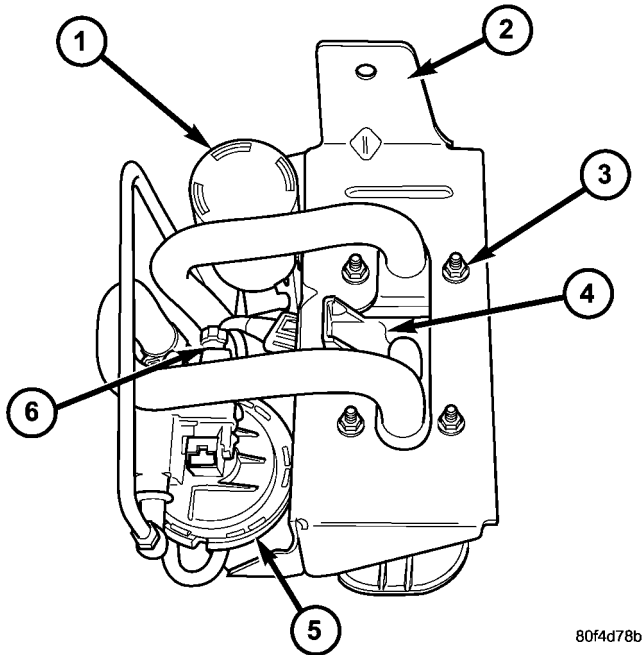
COMMON SUPPORT BRACKET ASSEMBLY
